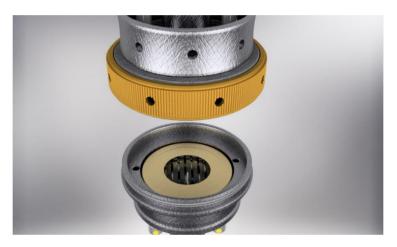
Rotate the threaded clamping ring on Chamber 1 in a counter-clockwise direction until you can slide the upper part of the chamber upwards on the tube.
